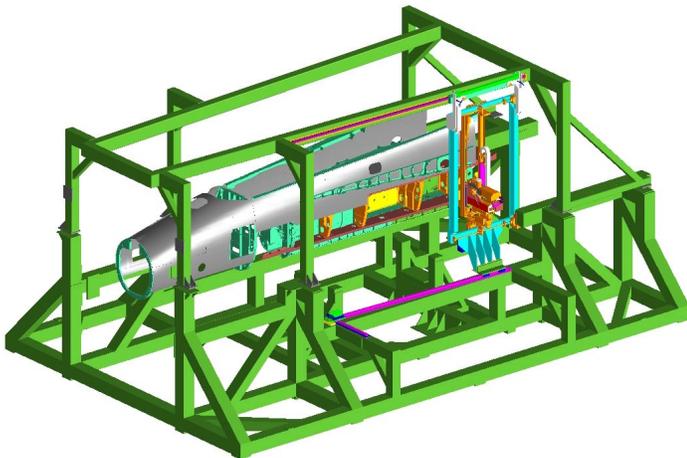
Numerically Controlled Drill Jig (NCDJ) shown Attached to the Assembly Jig (AJ) of the F/A-18 E/F Forward Fuselage.
